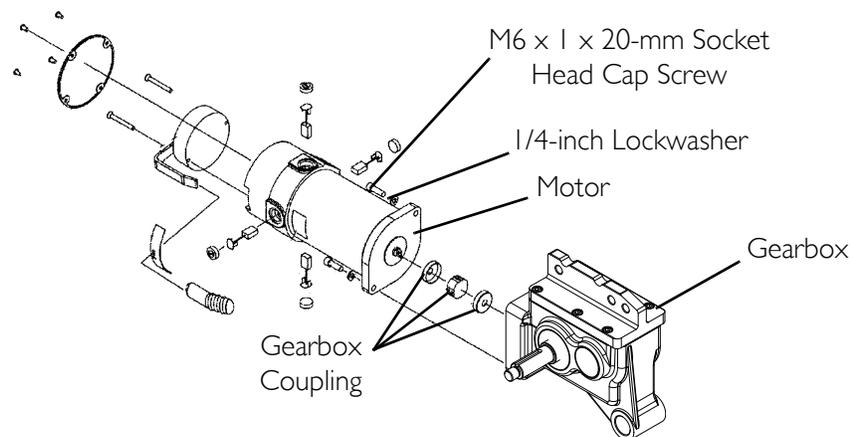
Removing/Installing the Gearbox Coupling
